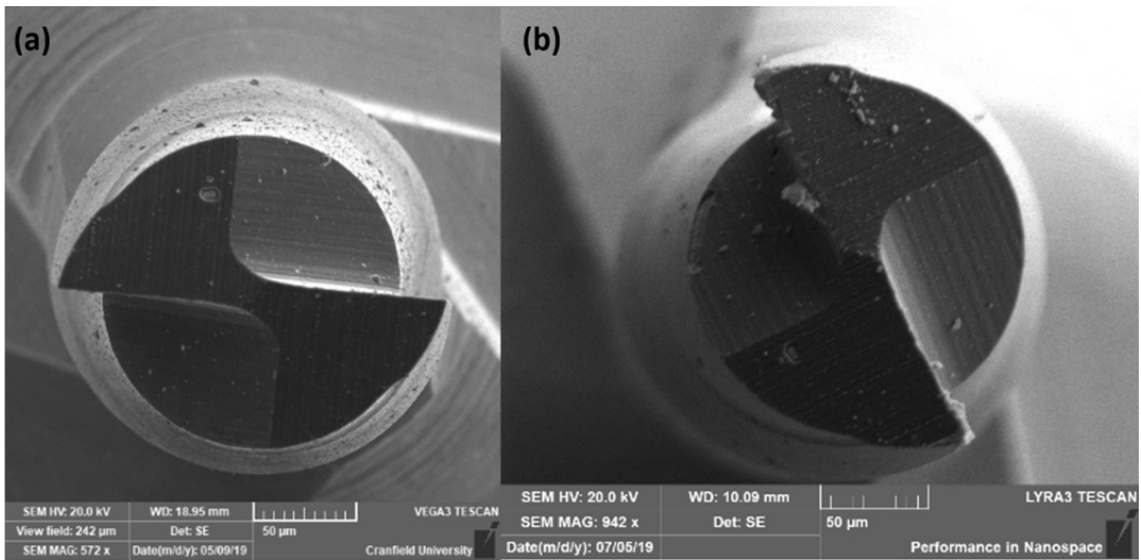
SEM image of tool 1 (a) before (b) after machining.
